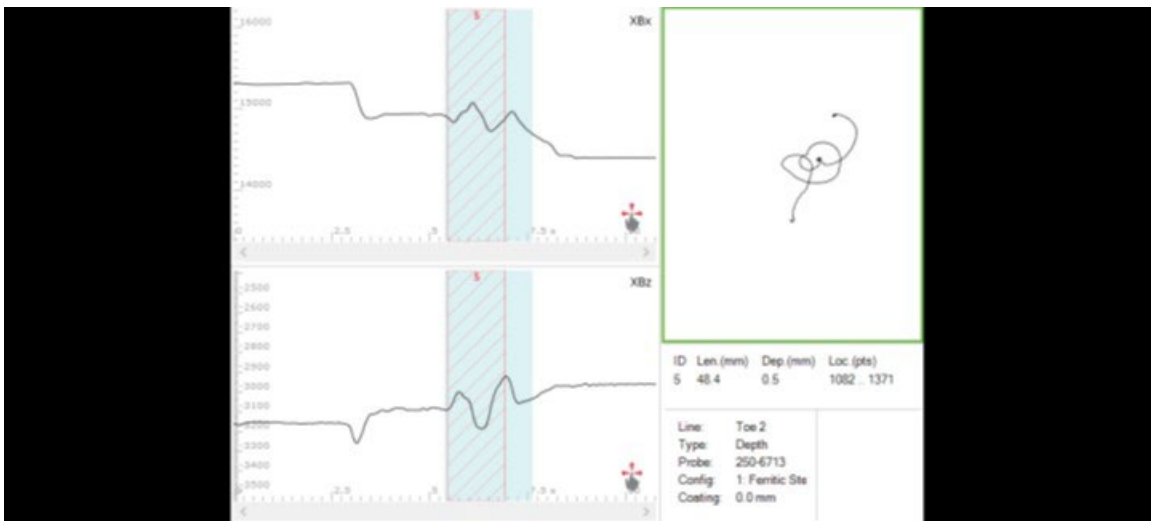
ACFM scan data of Flaw 3 for butt weld MG-13 panel
